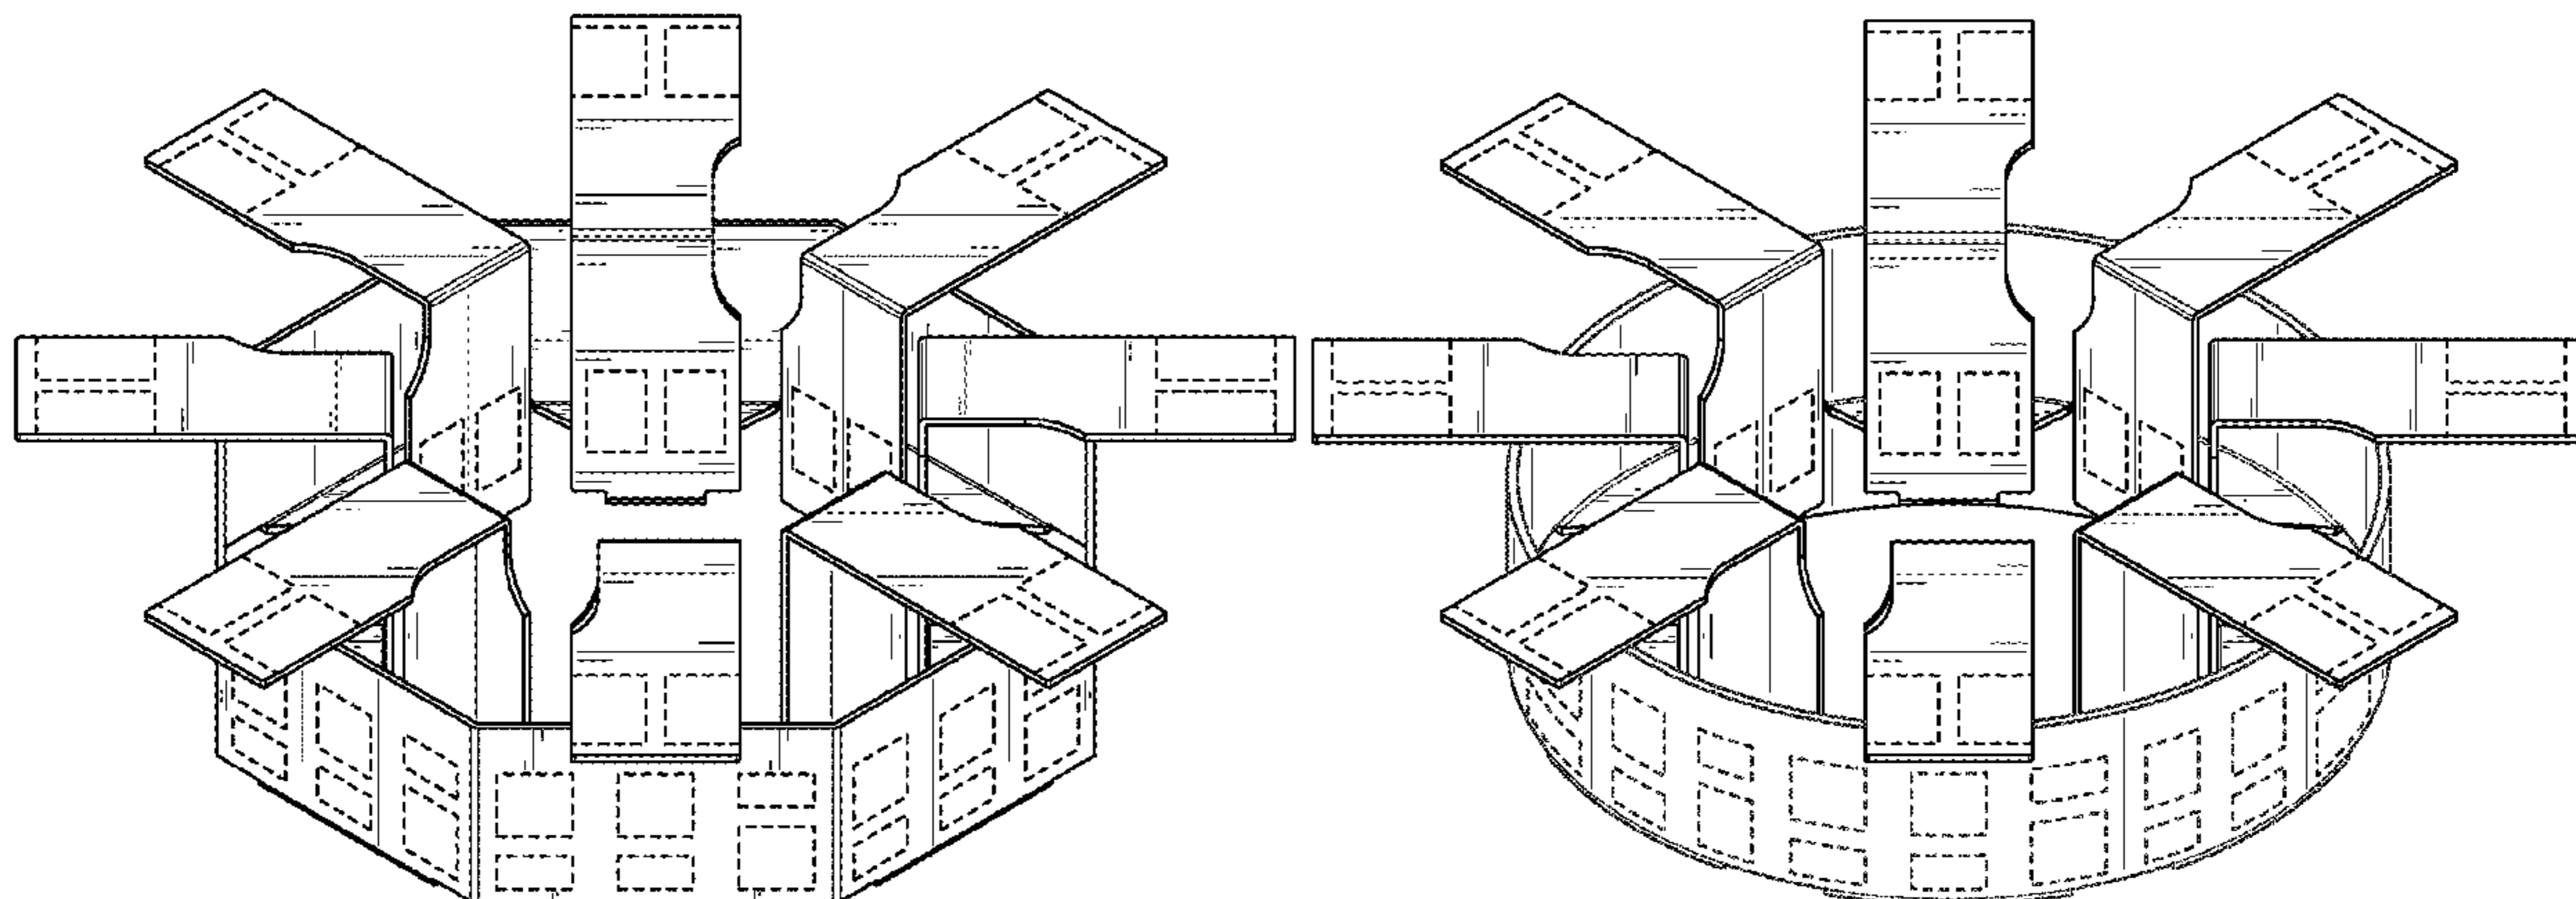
is a first side view of the flexible circuit board of FIG. 8;
